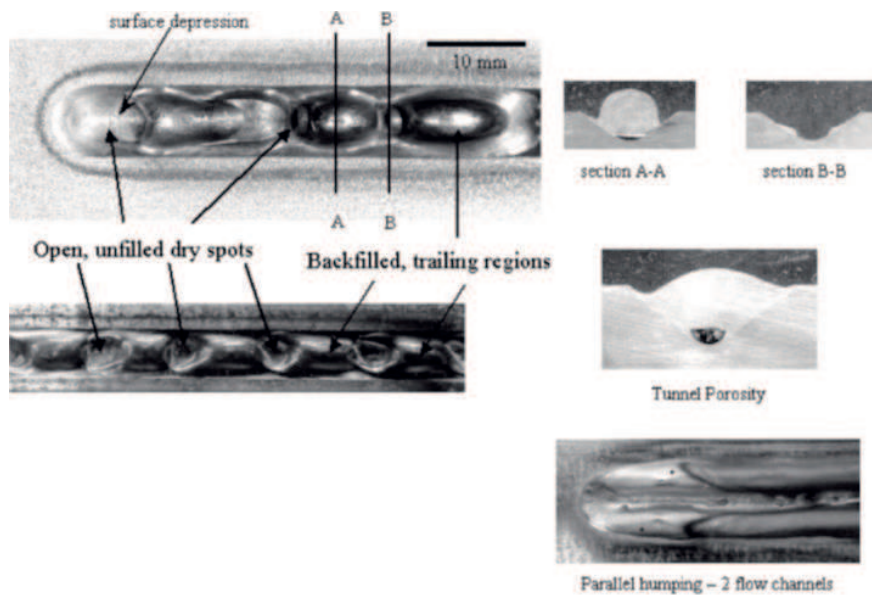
Humping phenomenon in arc welding, exhibiting the typical bead-like appearance.
